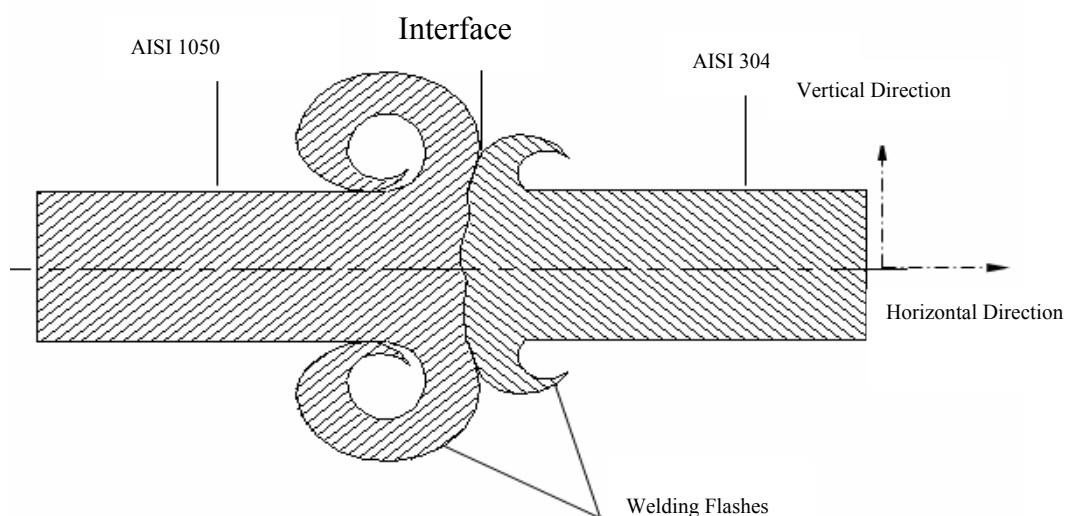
Horizontal plane in friction welded specimens
